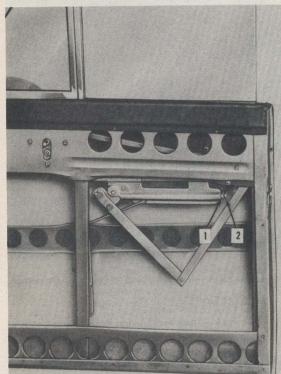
Adjusting Door Glass Control Arm Assembly.
